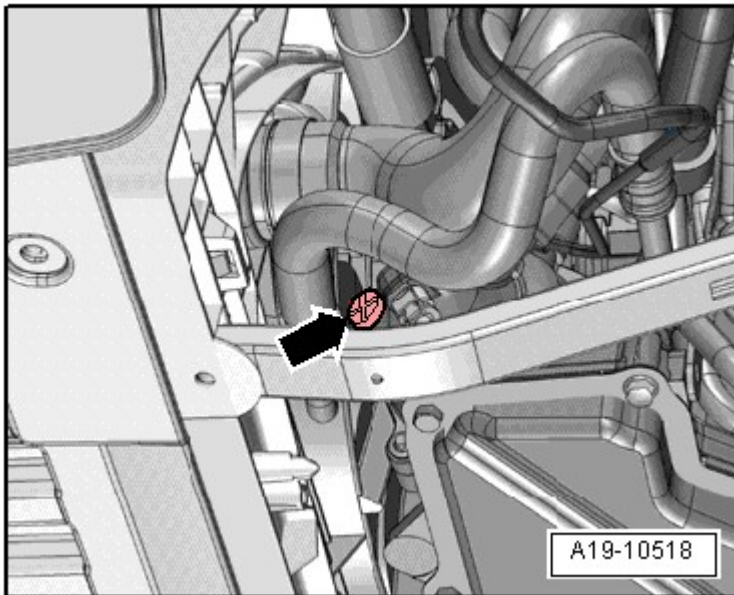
Identifying Drain Plug -Arrow- On Map Controlled Engine Cooling Thermostat -F265-
